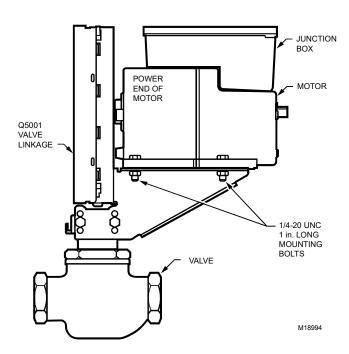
Mounting the motor on a Q5001 Valve Linkage.
